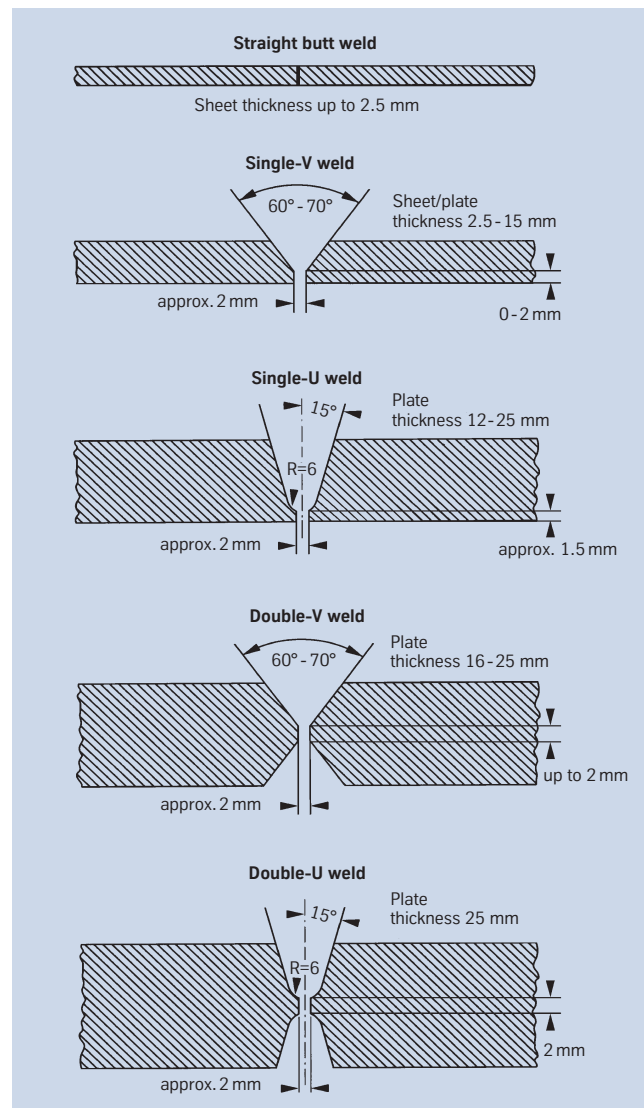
Edge preparation for welding of nickel-base alloys and special stainless steels.
